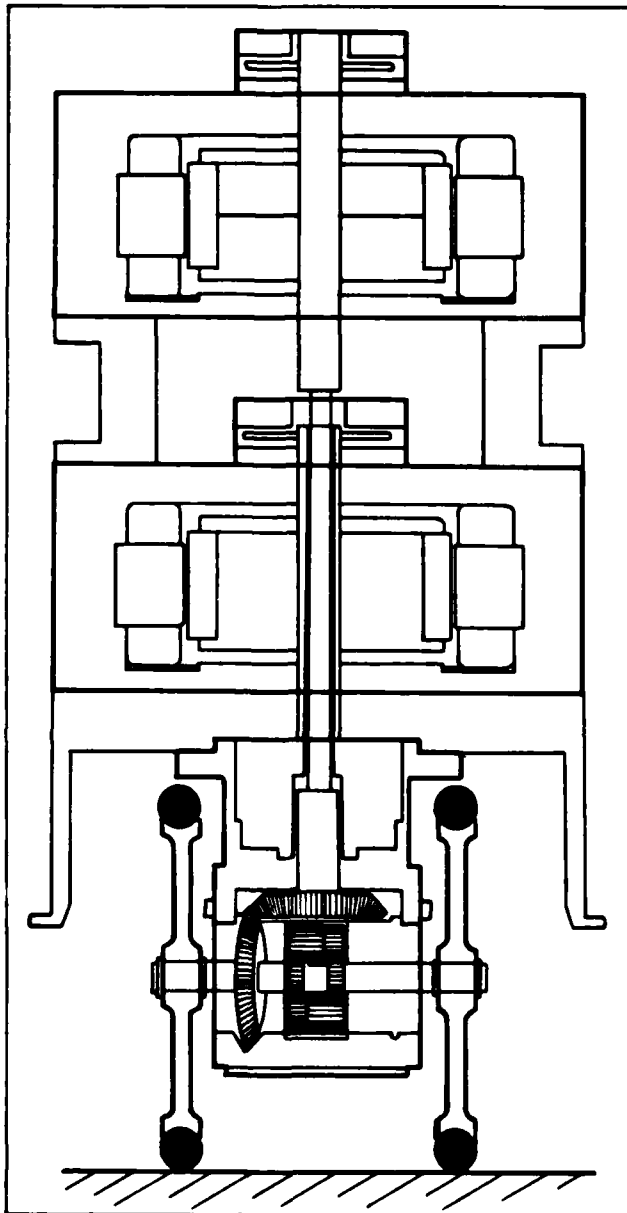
Diagram of a wheel assembly illustrating differential gear, concentric drive shafts
